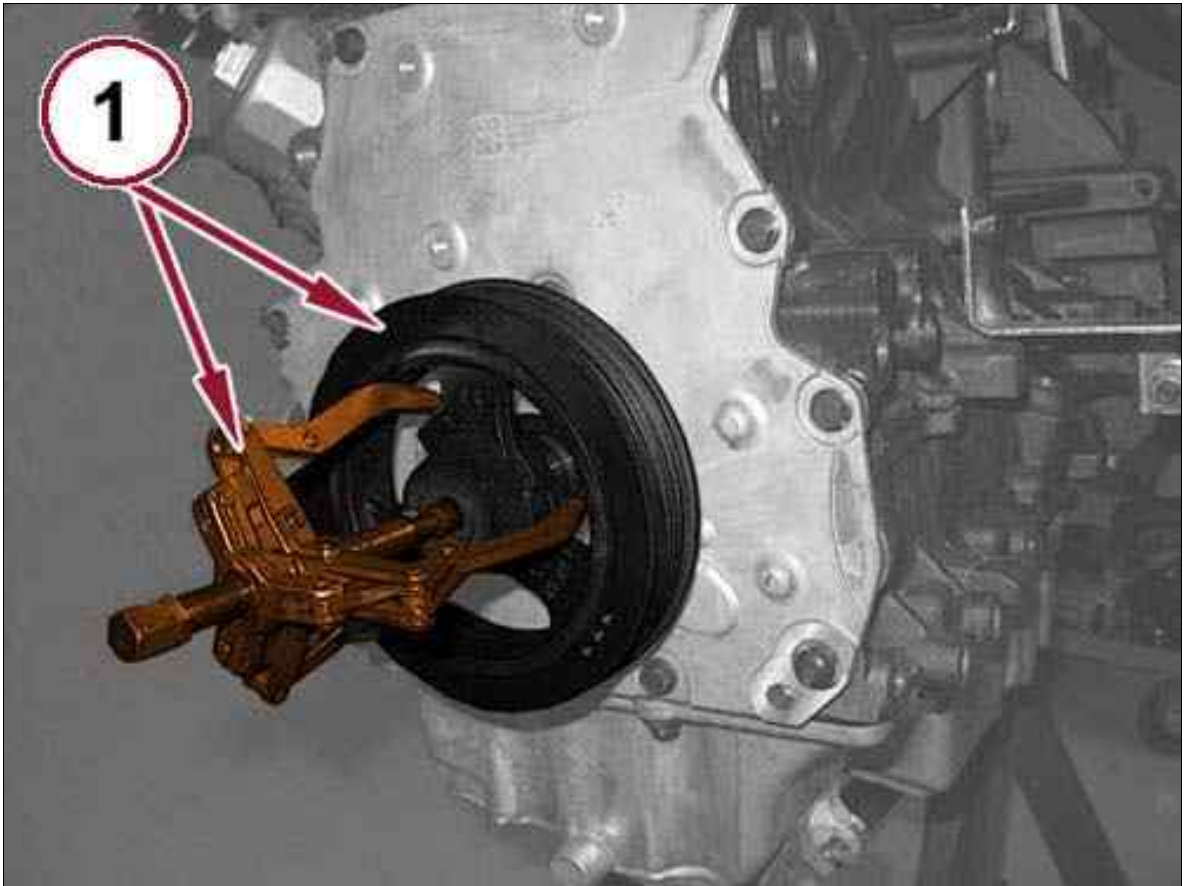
Inserting Special Tool In Crankshaft Pulley Hub
